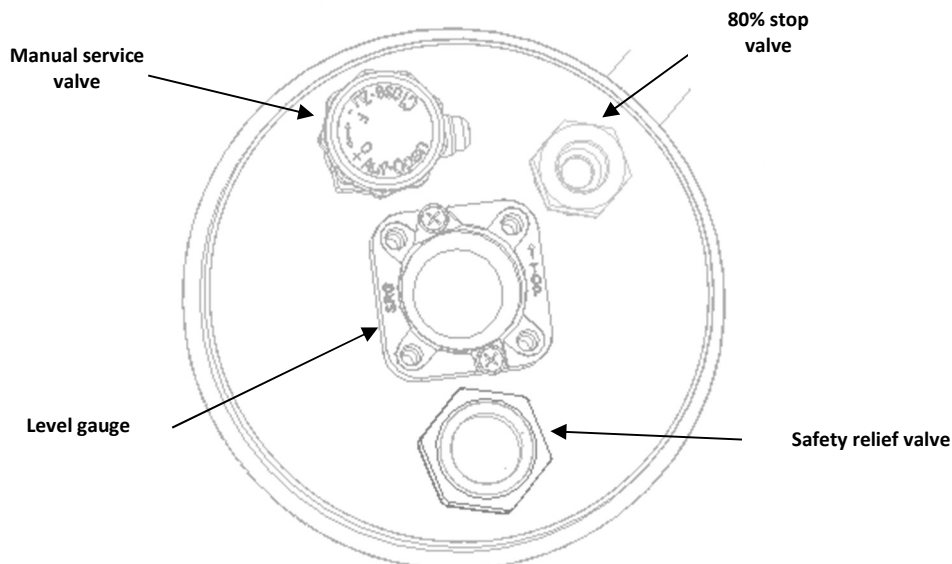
Layout of accessories in LPG cylinders with the valve plate
